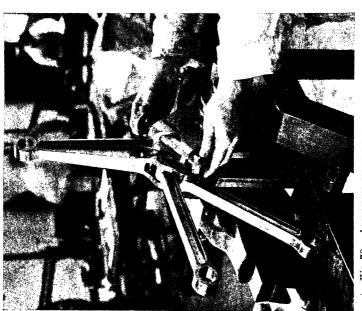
,—ASSEMBLY OF MANETON BOLT AND NUT.
